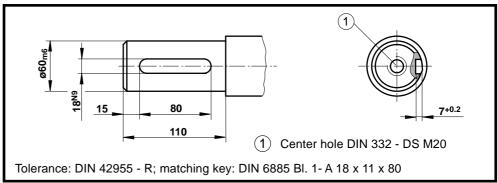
Main spindle motor ADF 160 - output shaft with key
